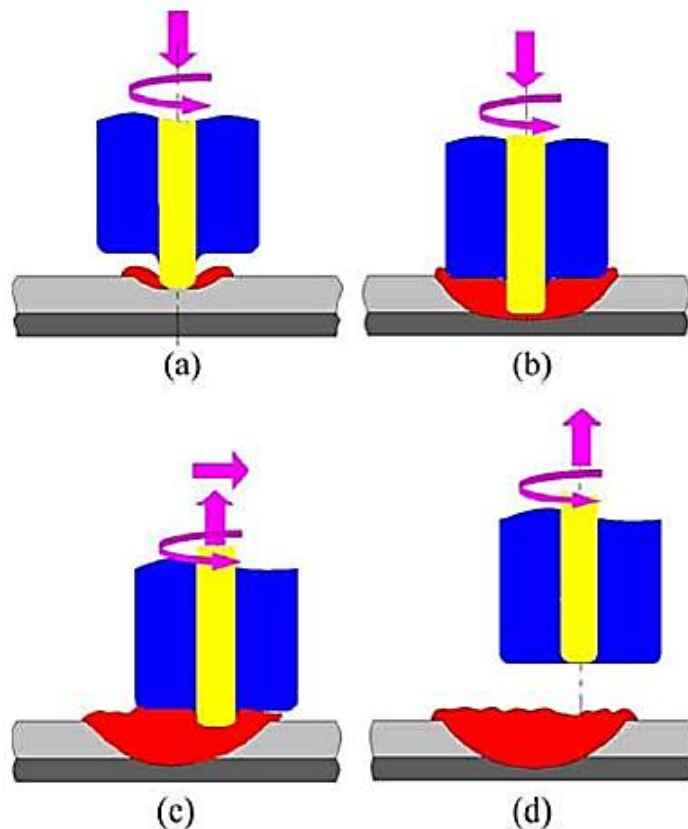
Friction Stir Keyholeless Spot Welding (FSKSW) (Zhang et al. 2014).
